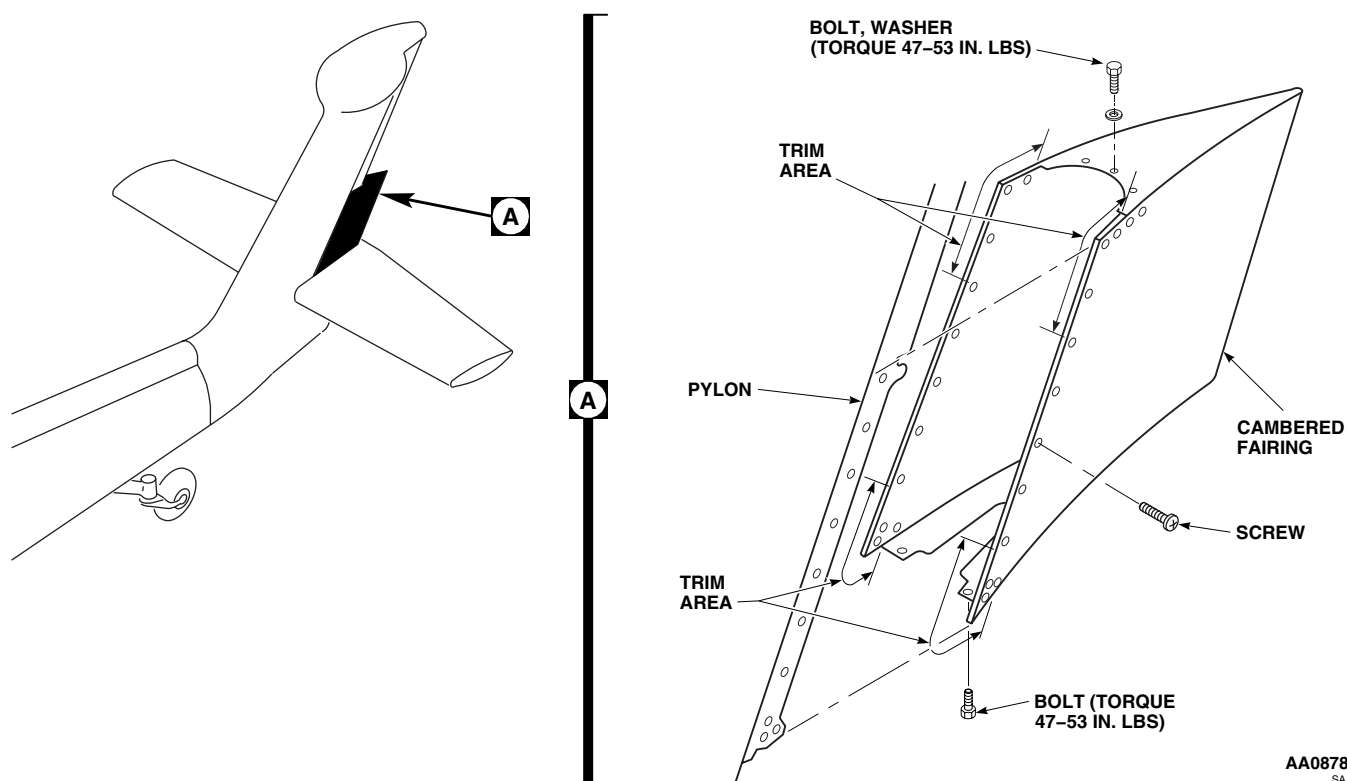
Replace Tail Rotor Pylon Cambered Fairing.
